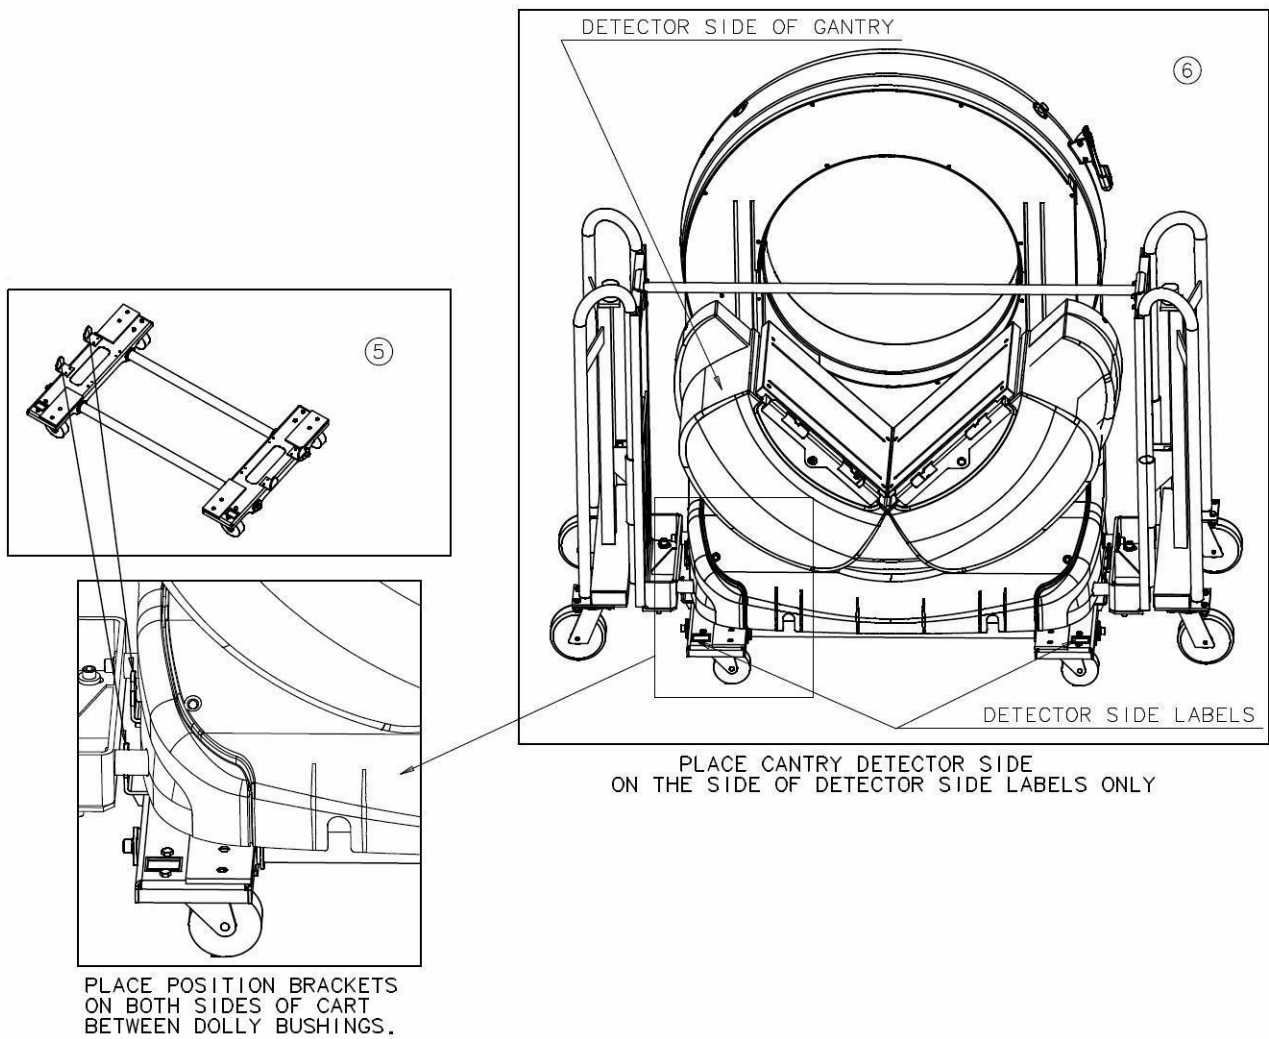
Unpacking and Assembling the Gantry Cart - 2
